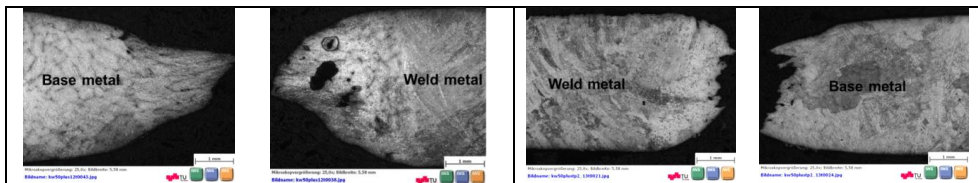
Fracture location of cross weld specimen 0.2 % Ni: 120 MPa (left), 100 MPa (right).
